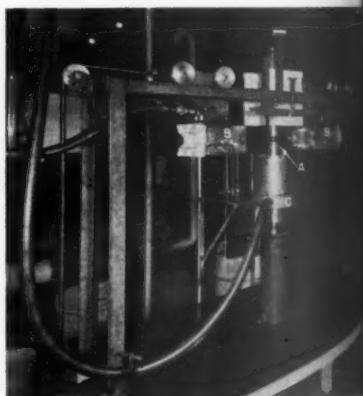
Ready for hardening by high-speed gas heating. Specimen (A) is mounted between two specially designed burners (B)
